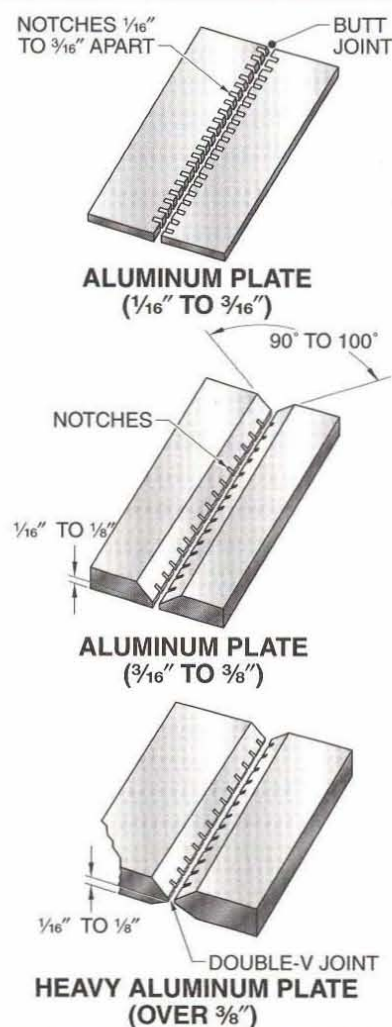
Aluminum joint design is similar to that for most other metals. The angles, notches, and flanges are dependent on the thickness of the aluminum.
